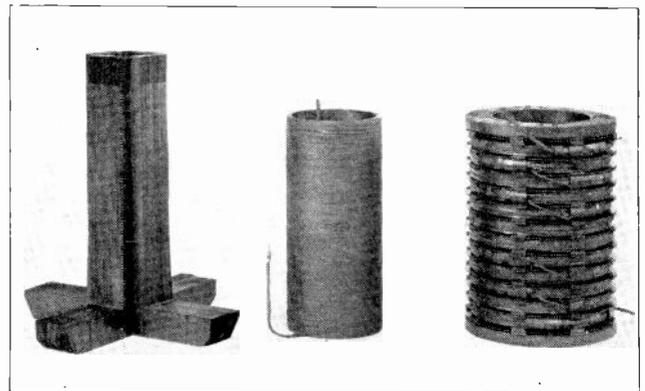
This view shows a partly assembled core of the distributed type and the primary and secondary windings which are ready to be placed on the core. (Photo Courtesy General Electric Co.)
